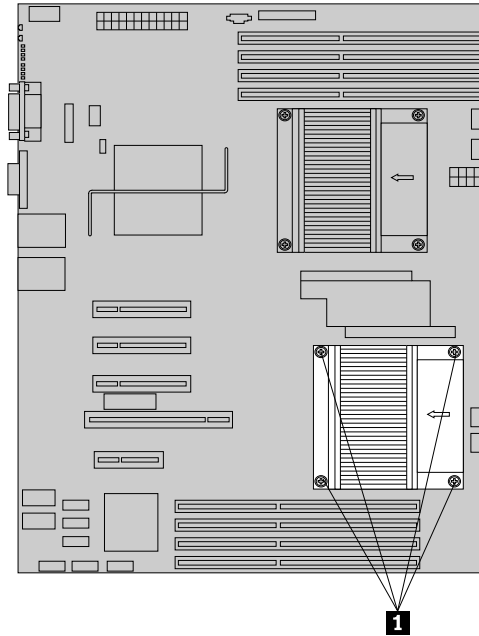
Screws that secure the heat sink and fan assembly for microprocessor 2
